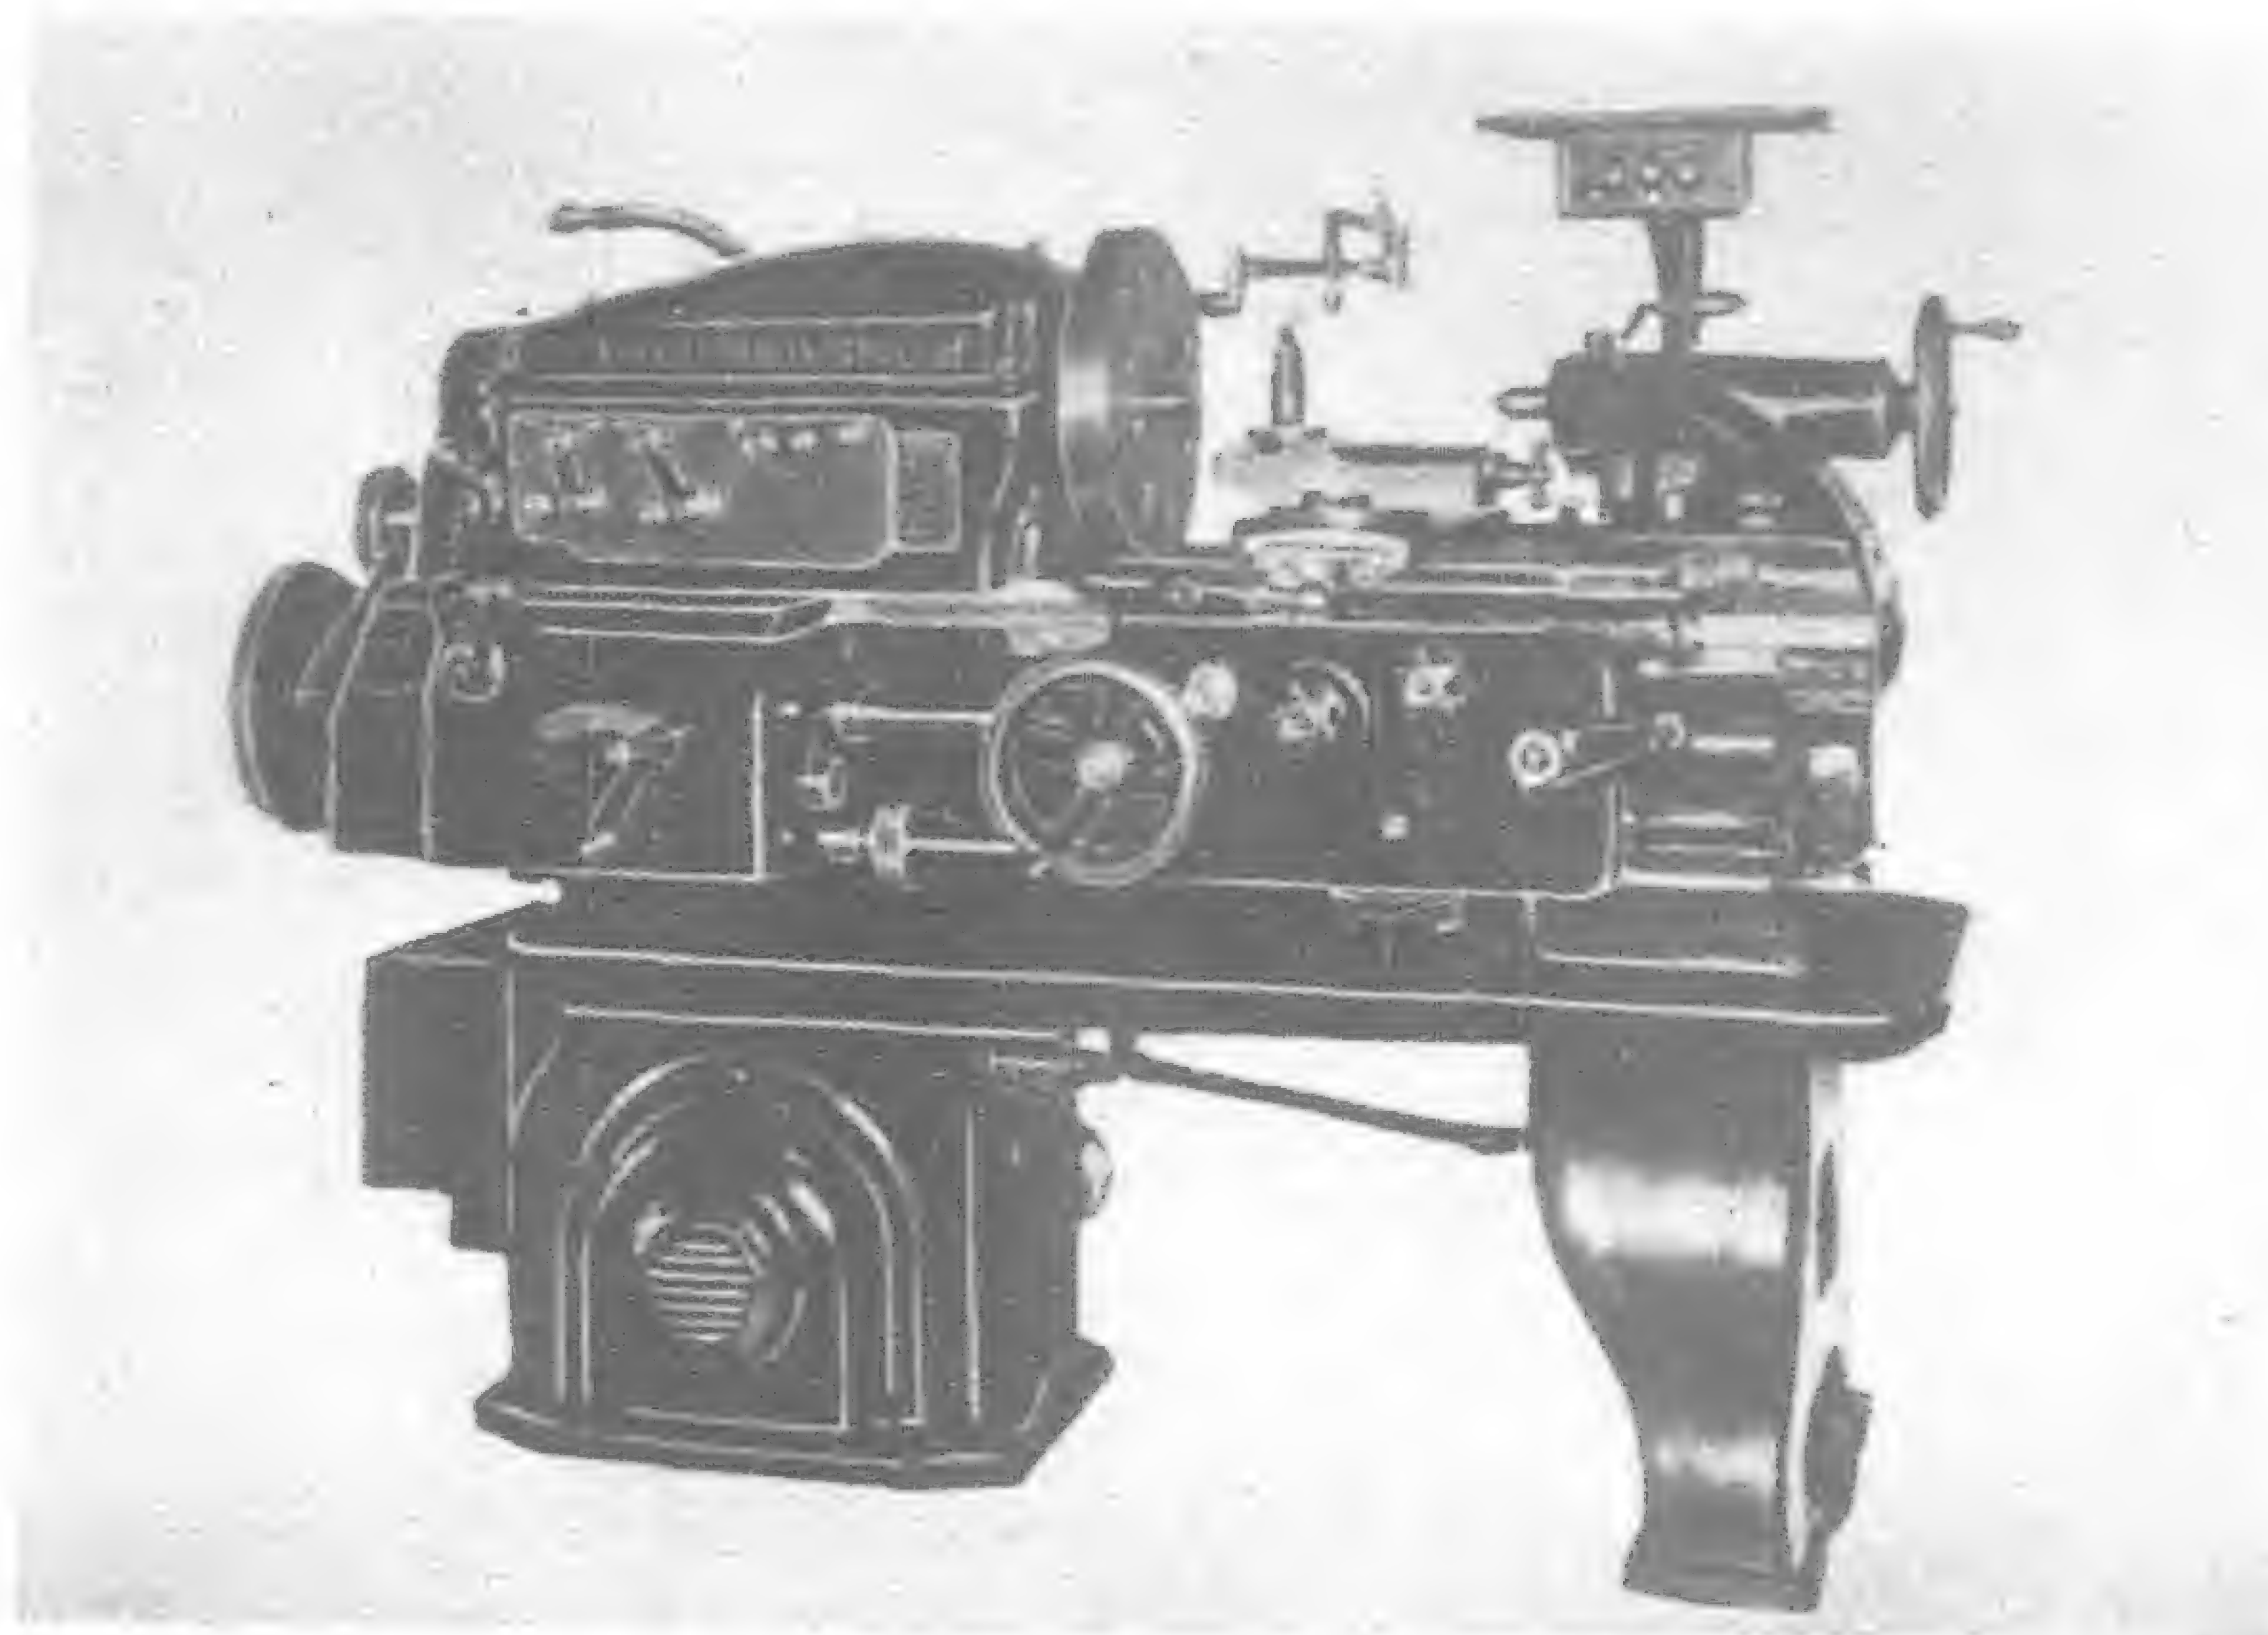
10-in. by 4-ft. 0-in. (254 by 1219 mm.) Heavy Duty Tool Room Lathe, manufactured by Roku Shoten. Gears of Case-Hardened Nickel-Chromium Steel
